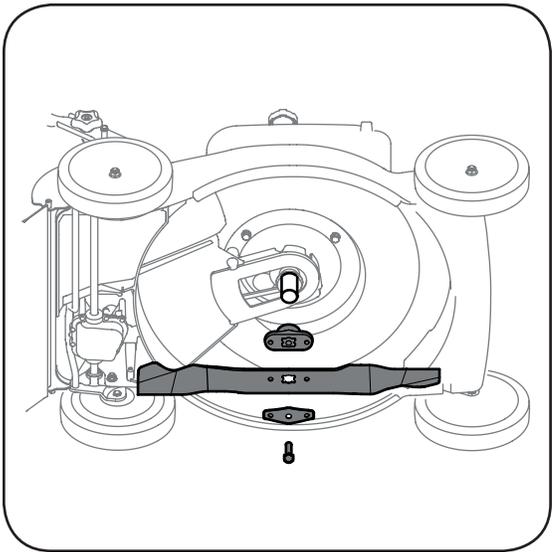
REMOVE BOLT BELL SUPPORT ADAPTER FROM THE ENGINE CRANKSHAFT, & GAIN ACCESS TO THE BLADE
